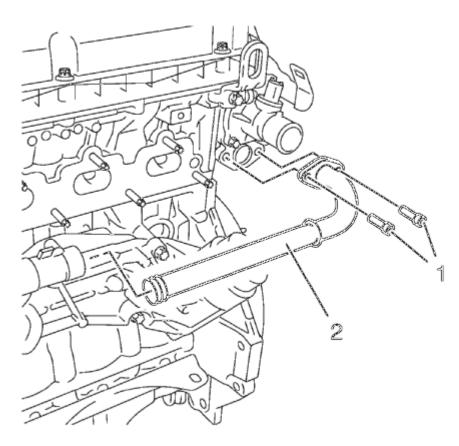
Identifying Engine Oil Cooler Housing, Bolts And Engine Oil Cooler Inlet Pipe Courtesy of GENERAL MOTORS COMPANY
